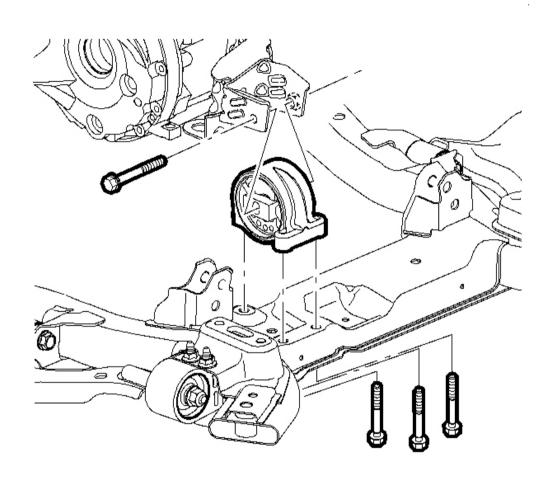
Locating Engine Mount Courtesy of GENERAL MOTORS CORP.
